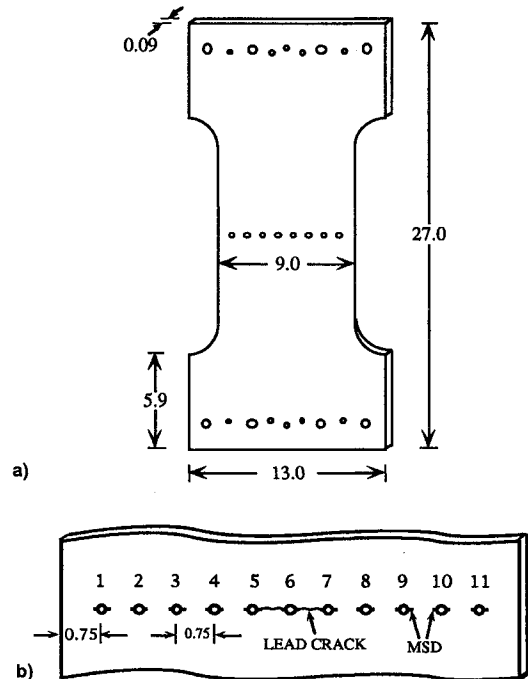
Typical RS specimen (RS-01) with nominal 0.16-in. hole diameter: a) global specimen configuration (dimensions in inches) and b) detailed view of crack plane showing hole, lead crack, and MSD locations (dimensions in inches).
